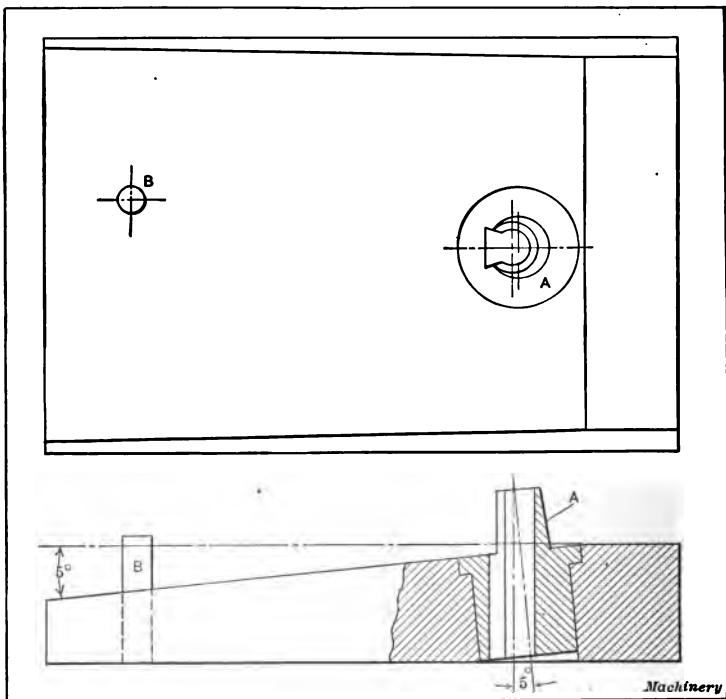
Broaching Fixture for the Slip-hub shown in Fig. 41
